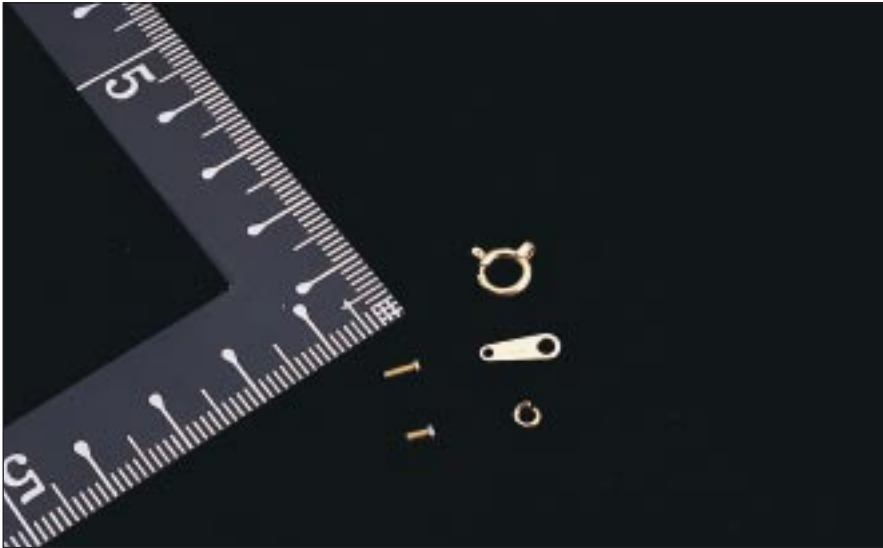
Findings in PureGold. The screws were machined and used in the eye glass frames shown in Figure 9.
